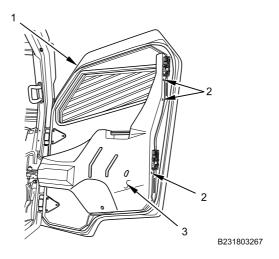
Cabin Door Trim Panel Fasteners Removal.
